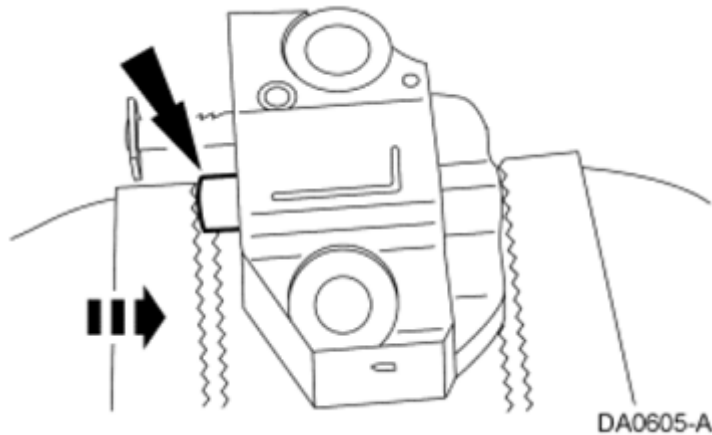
Compressing Each Tensioner Plunger Using Vise
